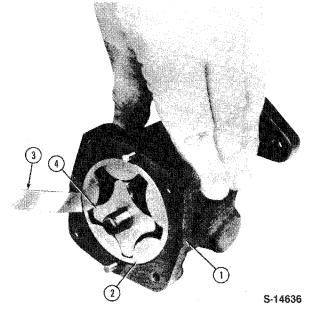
Measuring Outer Rotor to Pump Body Clearance
